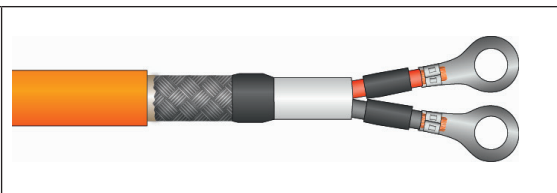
Step 7: Fitting the heat-shrink tubings and attaching the ring terminals
